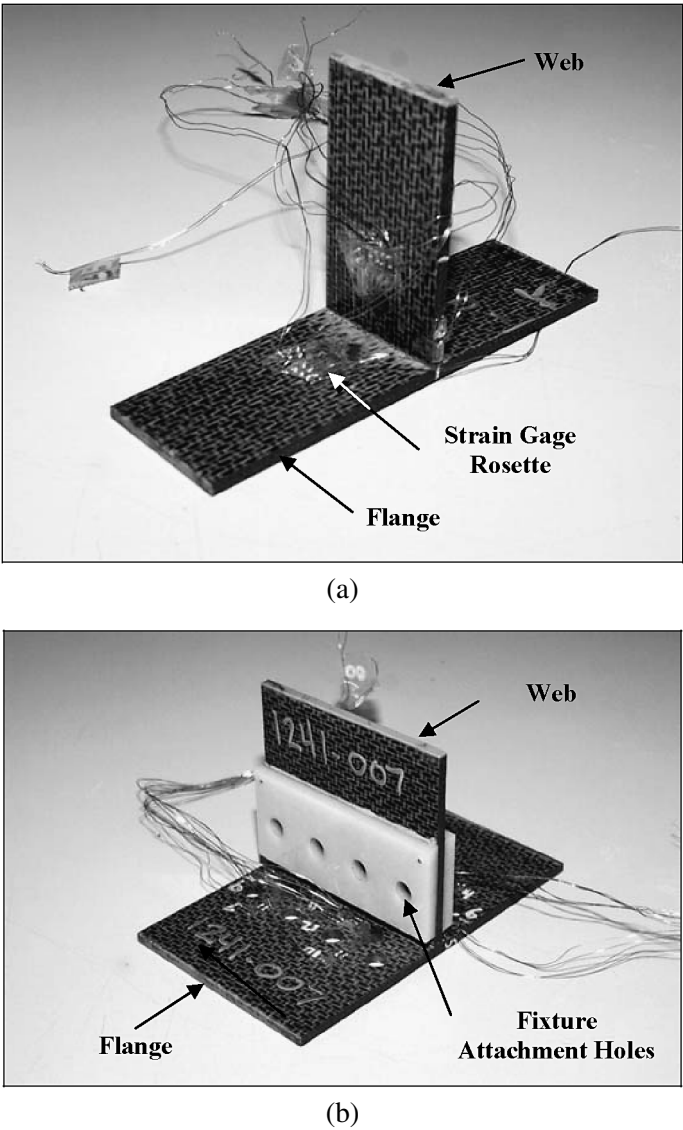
Typical T-joint specimens: (a) tension specimen showing instrumentation and (b) shear specimen showing instrumentation and fixture attachment holes.
